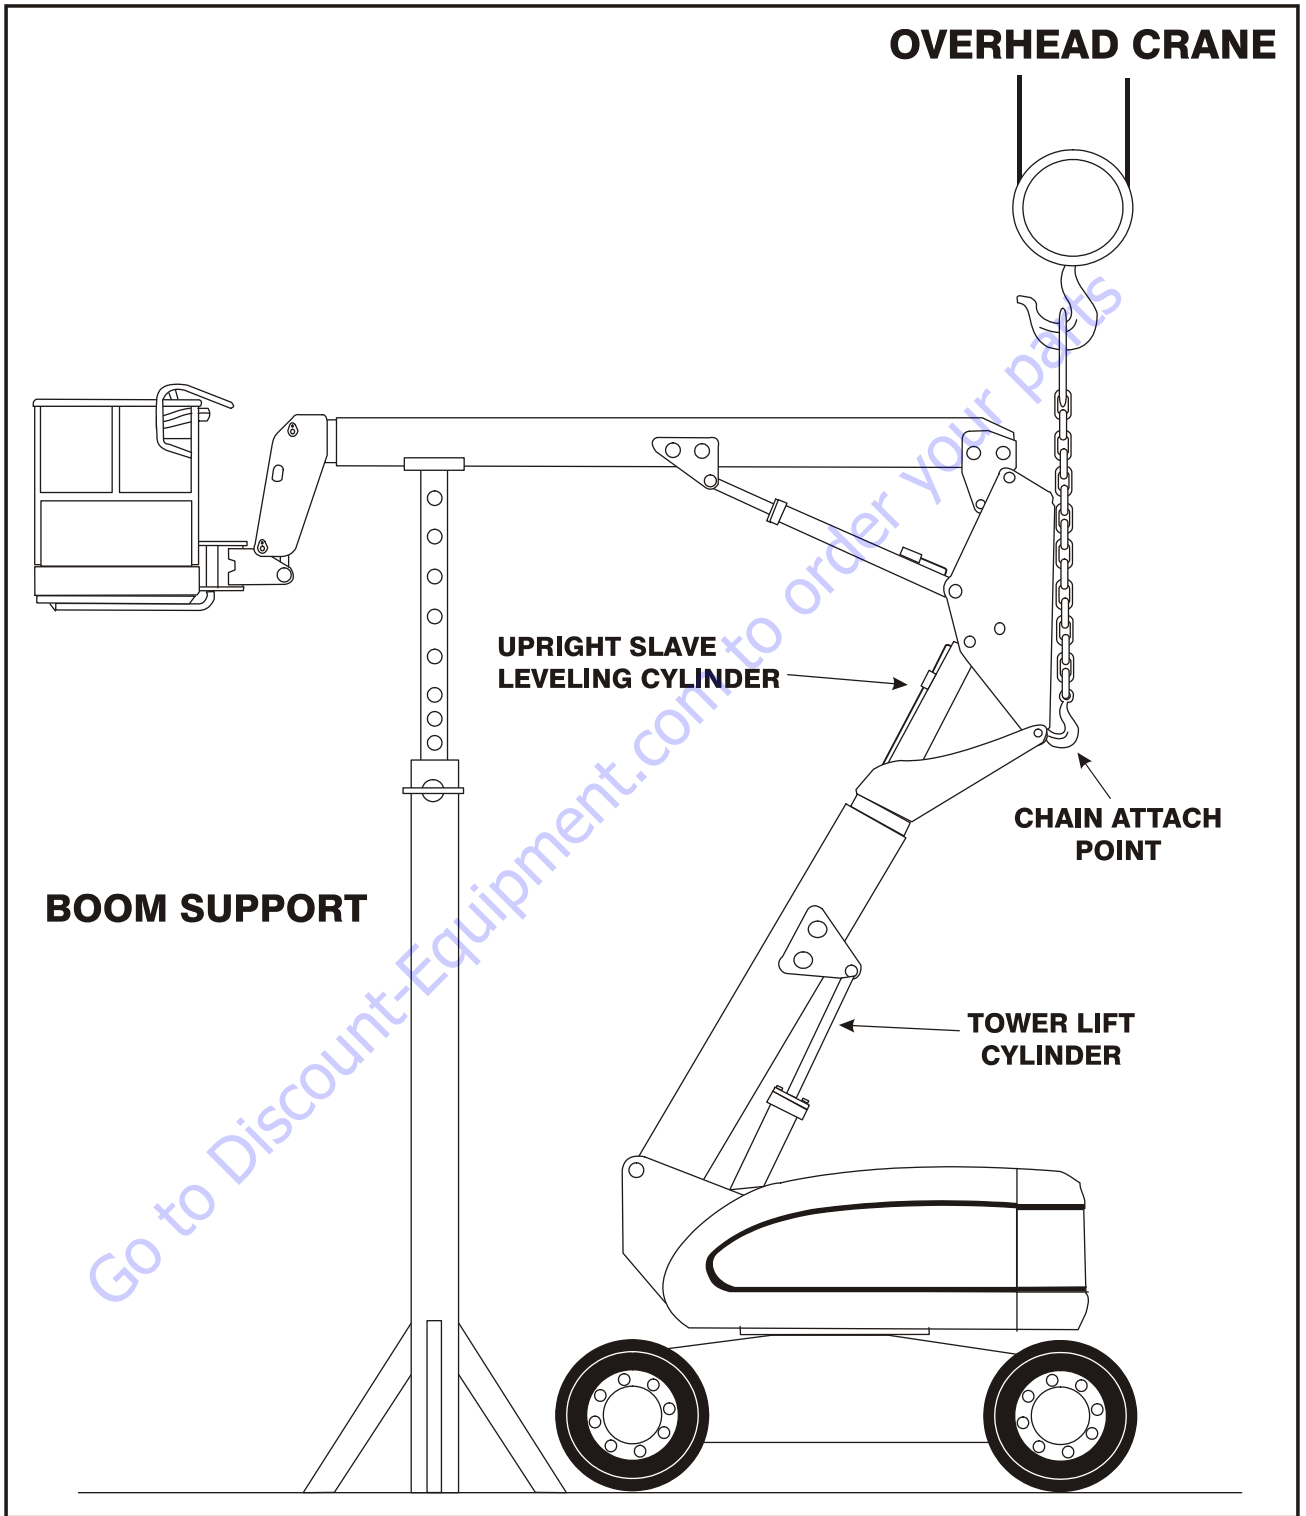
Boom Positioning and Support, Cylinder Repair
